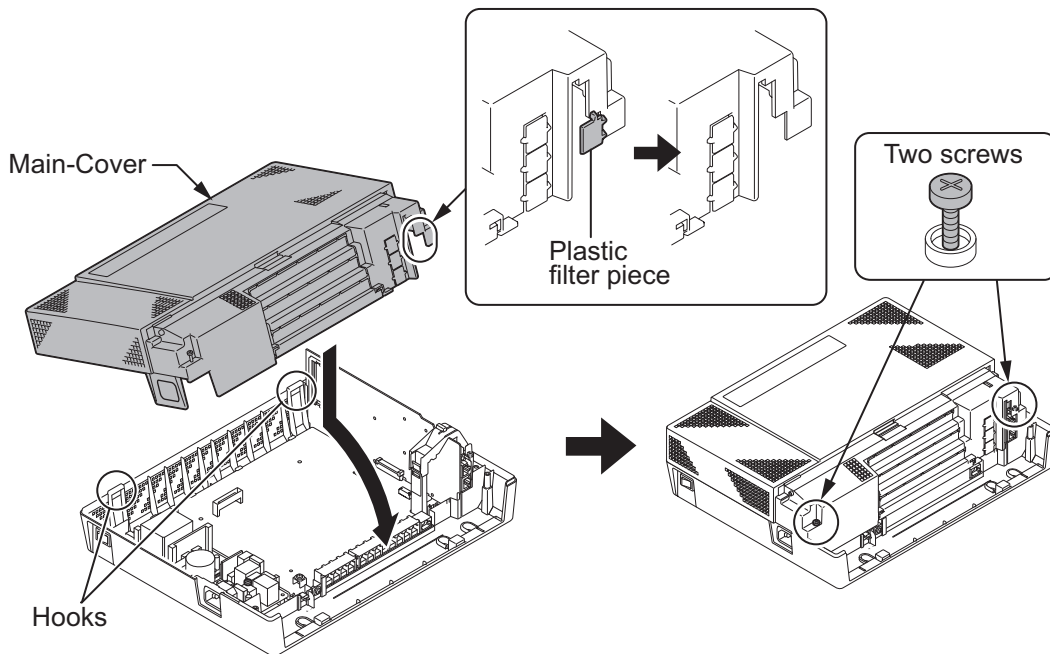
Removing the Plastic Filter Piece and Replacing the Main-Cover
